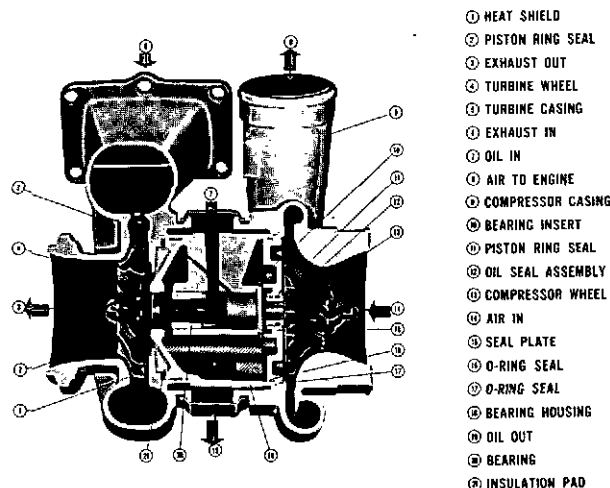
, AWC8, T-50 turbocharger cross-section
